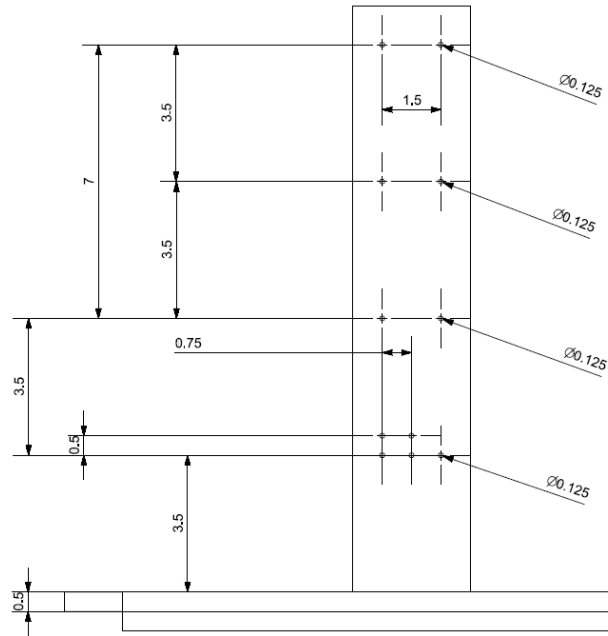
Vertical test stand dimension -*side view* (measurements in inches)
